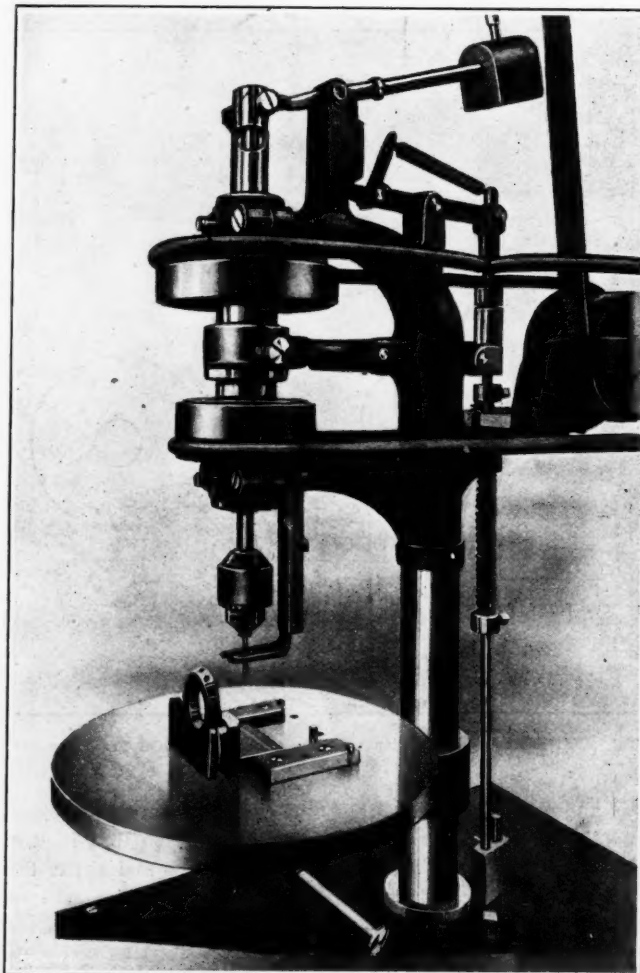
Machine and V-block Fixture used for tapping Setting Pin Hole
